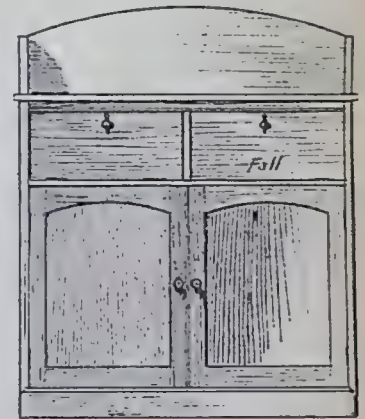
ALTERNATIVE CUPBOARD, WITH FALL-DOWN FLAPS.
